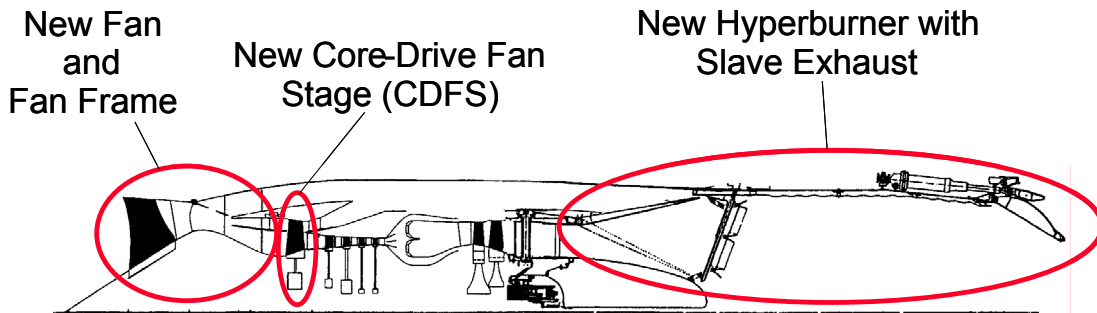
RTA-1 Mach 4+ Demonstrator Engine Definition.
